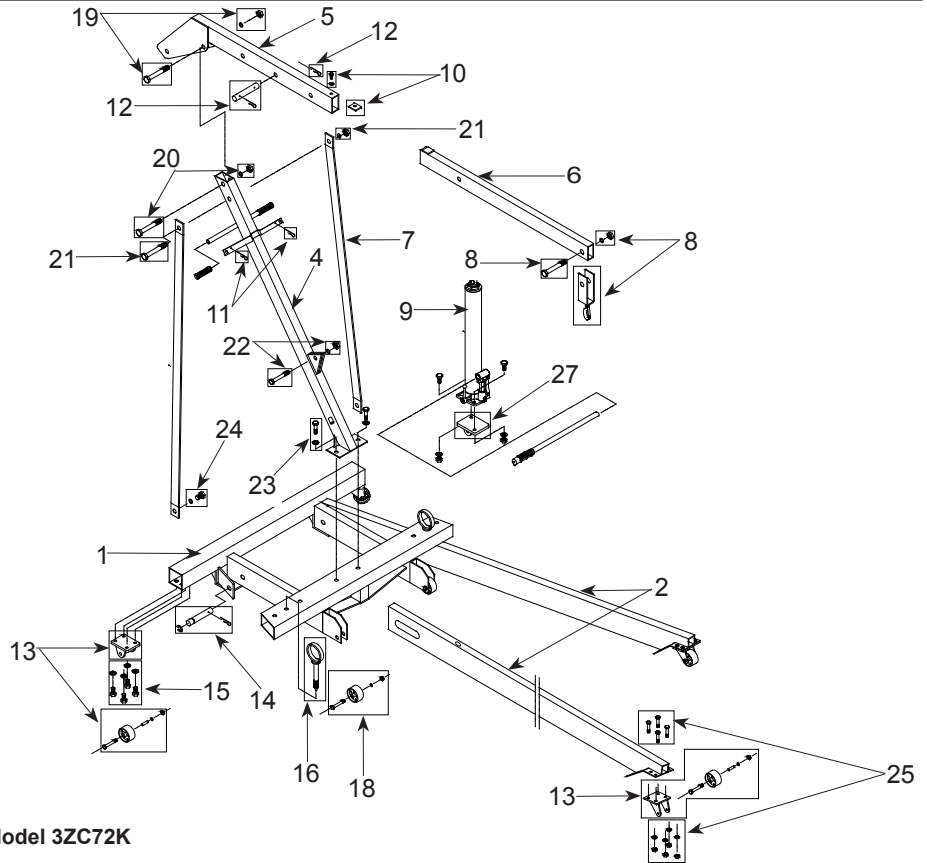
Assembly Parts Illustration for Model 3ZC72K
